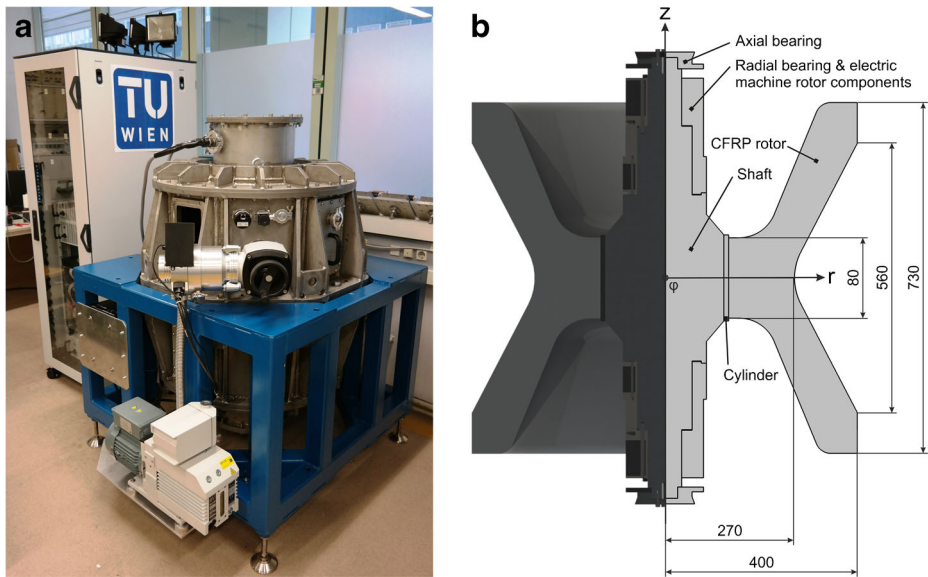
7 kWh FESS: a Flywheel test rig [19]; b Geometry of a 7 kWh flywheel rotor consisting of the CFRP rotor mass, shaft (aluminium), bearing and motor components (soft magnetic iron) and a steel cylinder to optimize the press-fitting process; dimensions in mm
